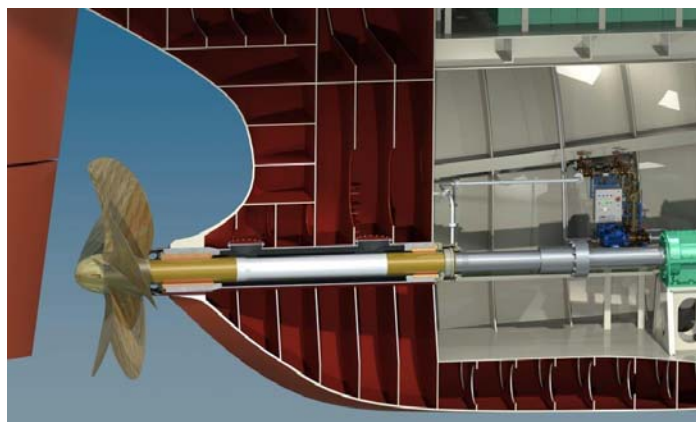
Typical seawater lubricated propeller shaft bearing system
